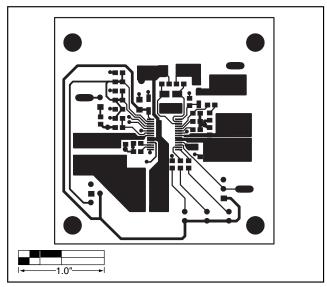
MAX1757/MAX1758 EV Kit PC Board Layout—Component Side
